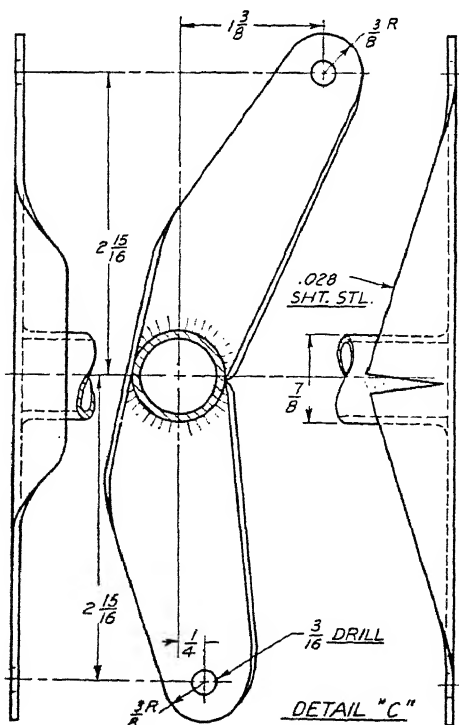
Elevator Assembly. Prob. 14-6.
